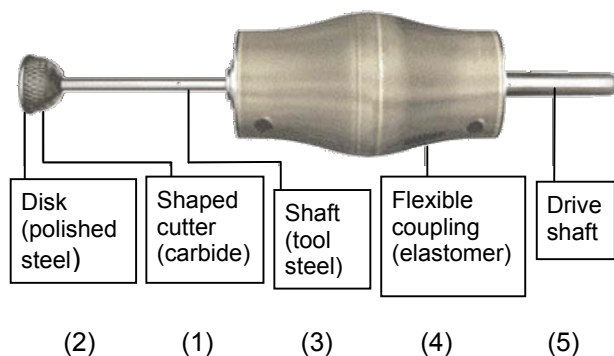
THE ORBITOOL AND ITS COMPONENTS.
